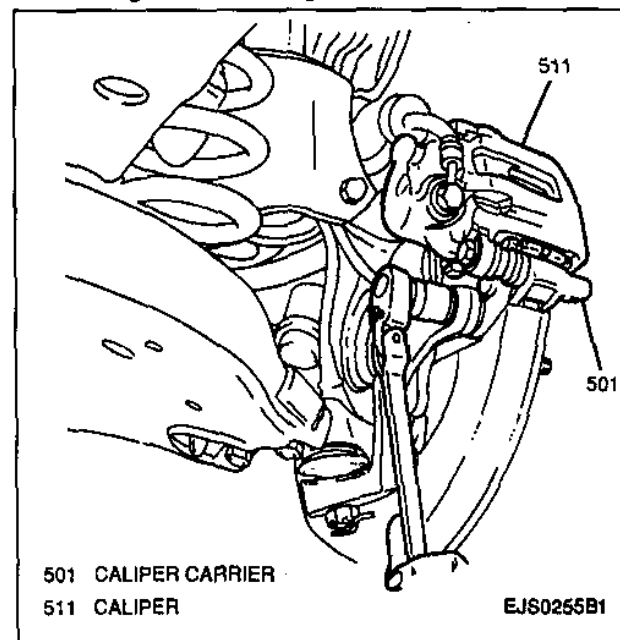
Removing Caliper/Caliper Carrier as an Assembly
